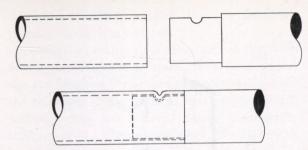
This is one method of joining a tube to a rod. Tube fits closely over a shoulder machined on the rod. Tube is then driven into one or more indentations in the rod as shown in the lower diagram. This locks the two parts securely together.
